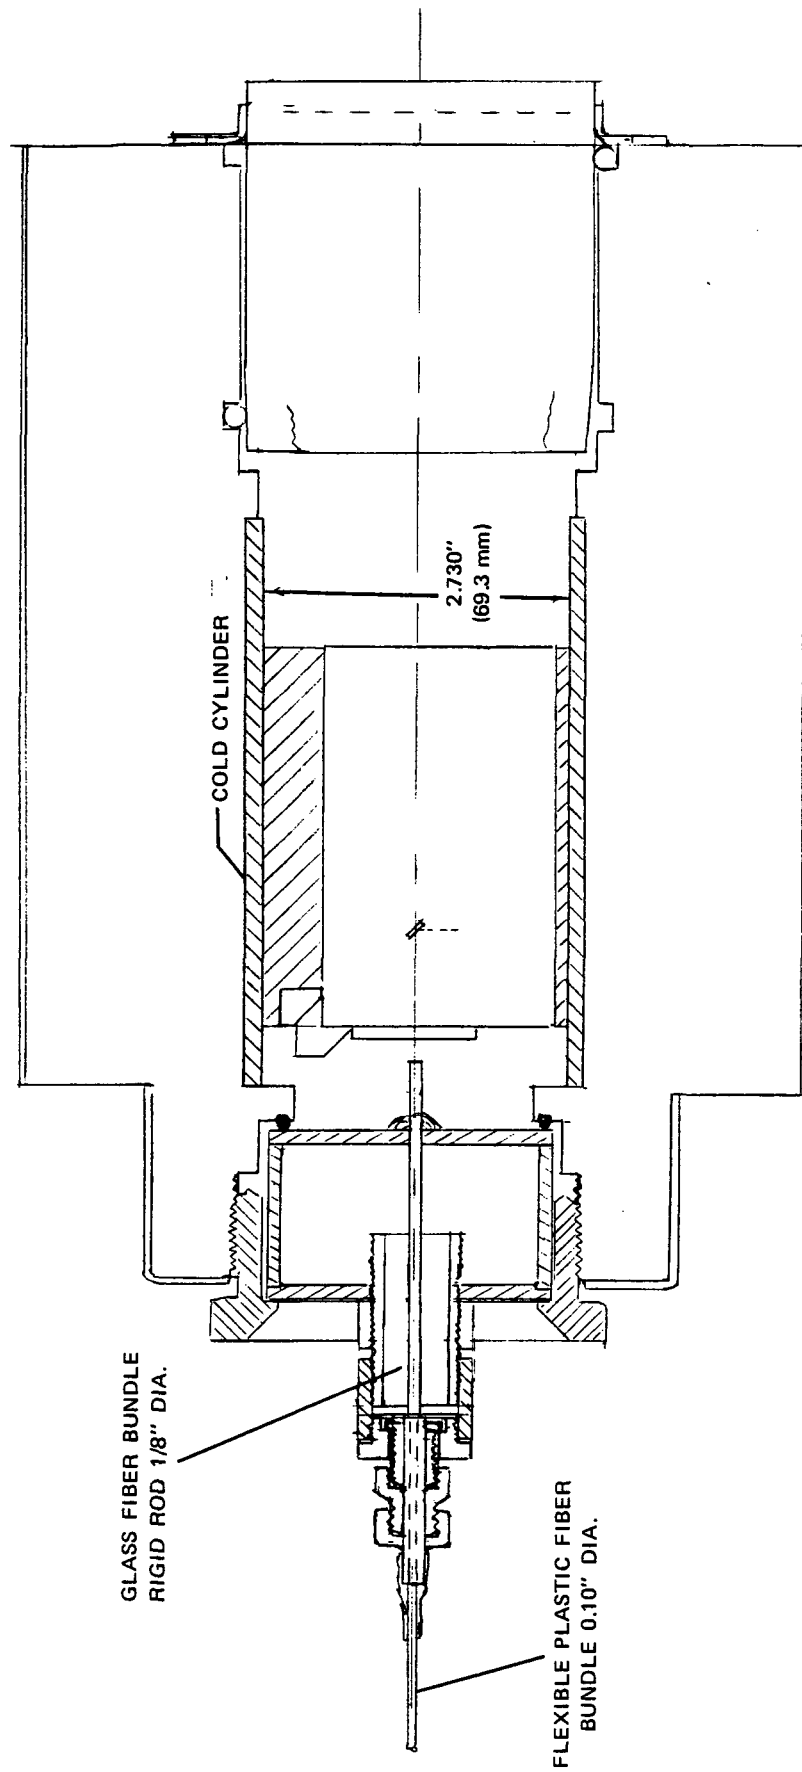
CROSS-SECTIONAL VIEW OF HOUSING, PMT, AND FIBER OPTIC INPUT COUPLING
